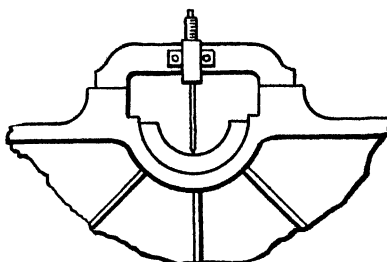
Bridge Gauge for Measuring to Bottom of Bearing Shell
